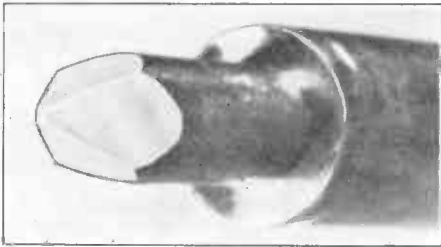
Close-up photograph showing a properly tinned soldering iron tip. Note that only the flat surfaces of the copper tip are tinned.
